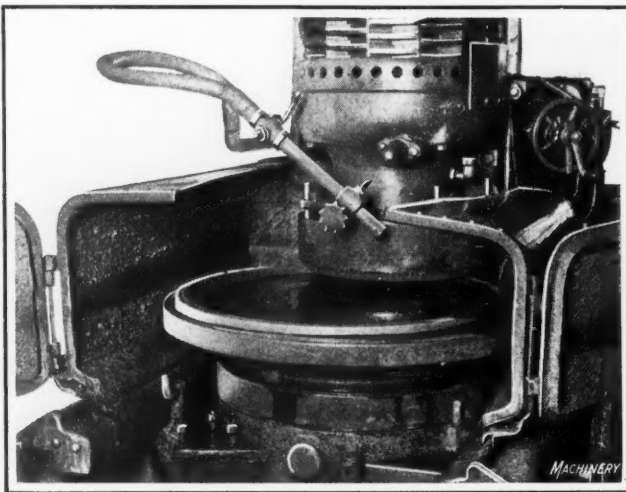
Surface-grinding Sides of Locomotive Piston-ring
